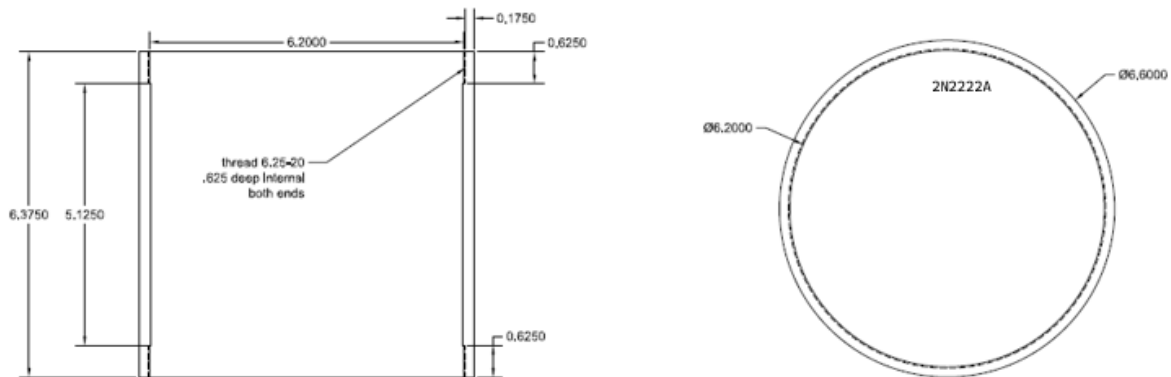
Mechanical Drawing of Aluminum Brew Chamber [2]
